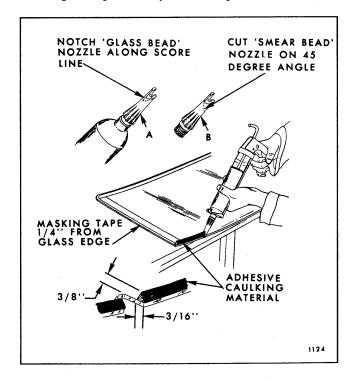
Adhesive Caulking Material Application -Extended Method
